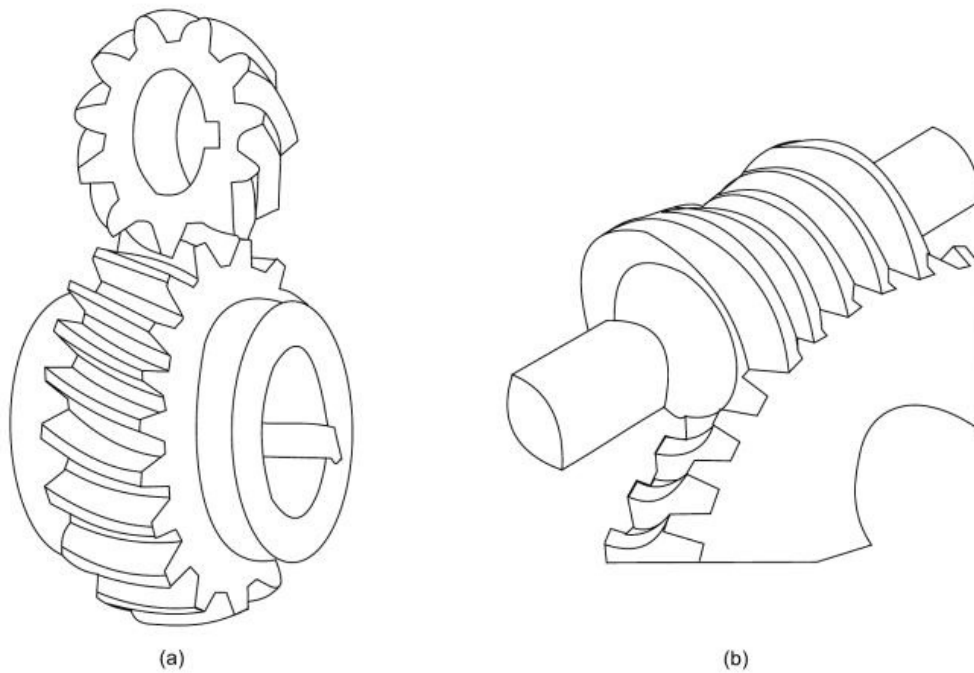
(a) Spiral gear pair (b) Worm-worm gear pair
